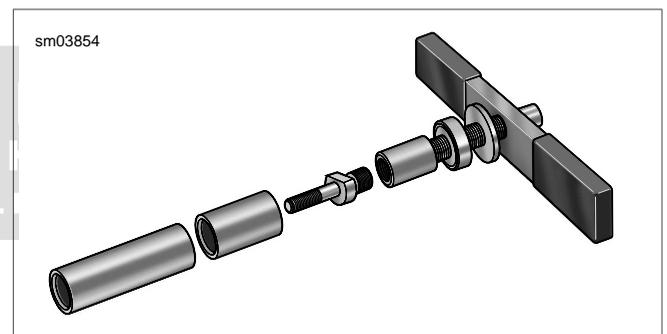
Sprocket Shaft Bearing Installer (Part No. HD-97225-55C)
